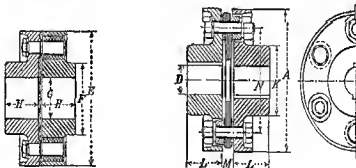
Rubber Bushing Coupling. FIG. 69.—Flexible Disk Coupling.
